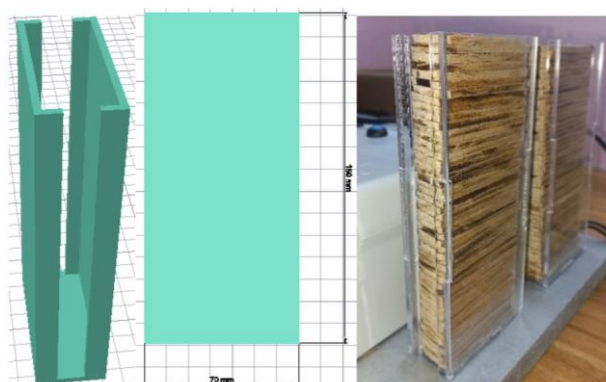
Frame holder design in CAD software and final piece machined in acrylic
